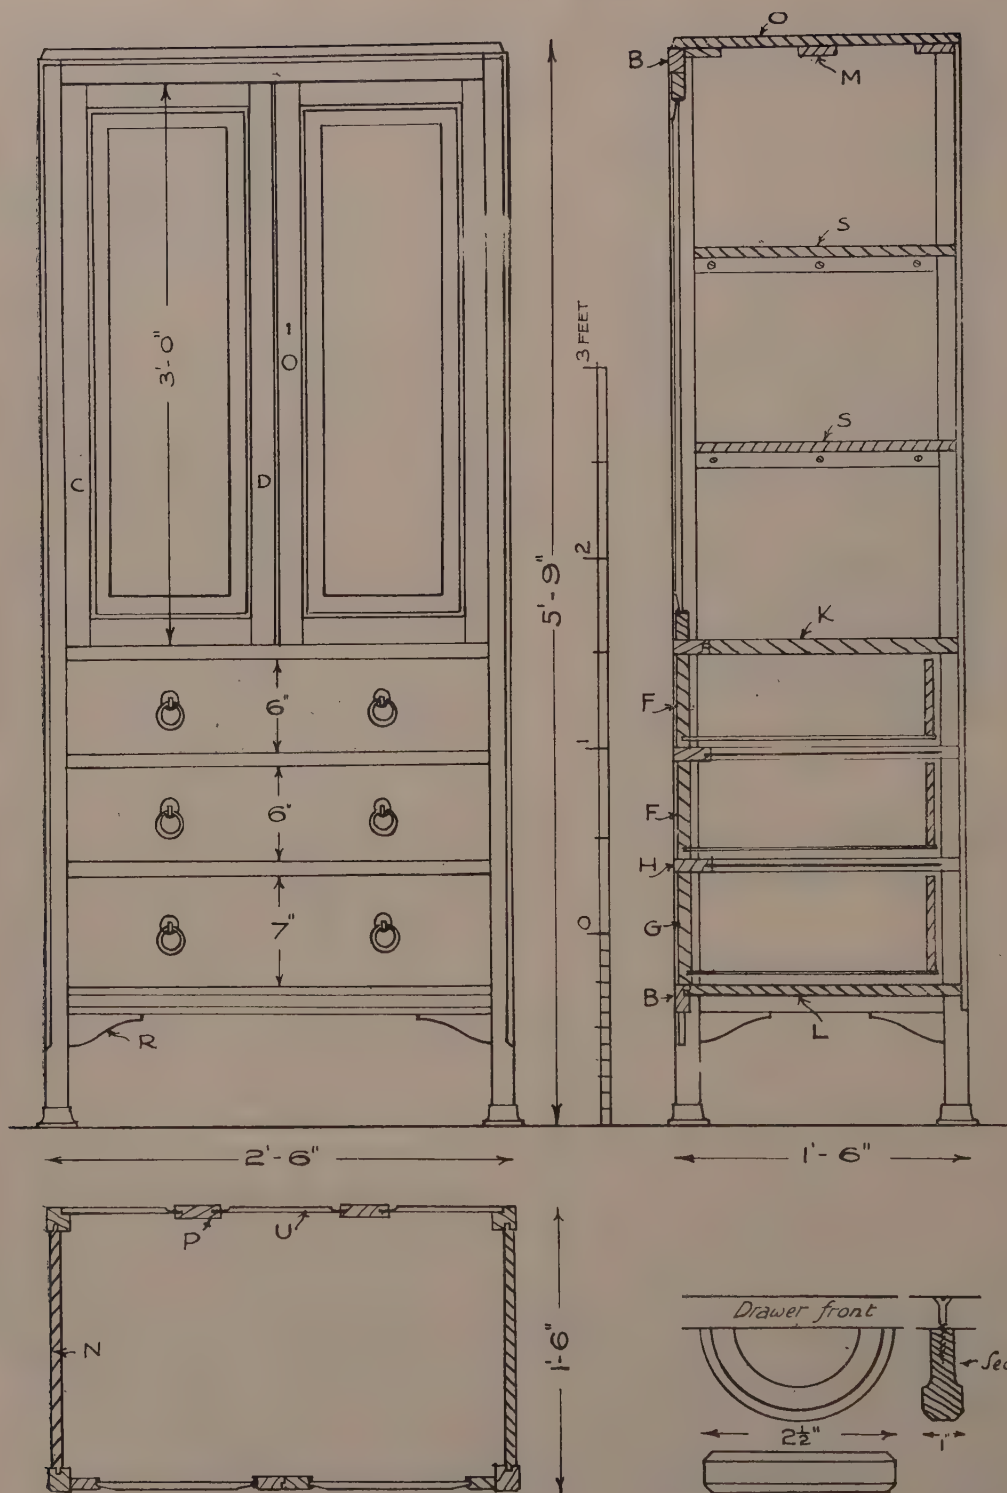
SCALE ELEVATION SECTION AND PLAN.
